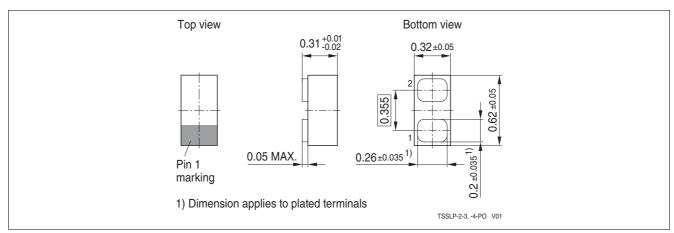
TSSLP-2-4 Package outline (dimension in mm)
